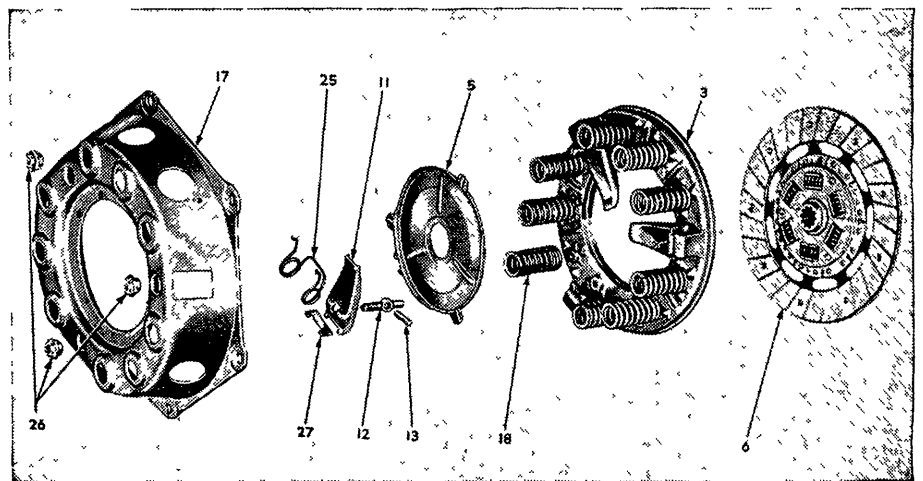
Exploded view of Borg & Beck clutch with baffle plate
